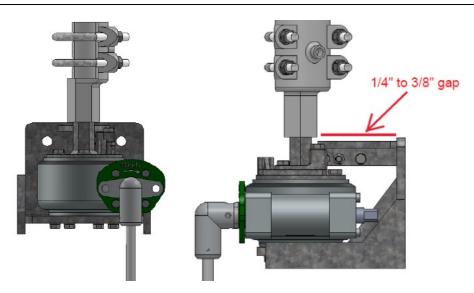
Type SEGO (Safety Enhanced Gear Operator)
